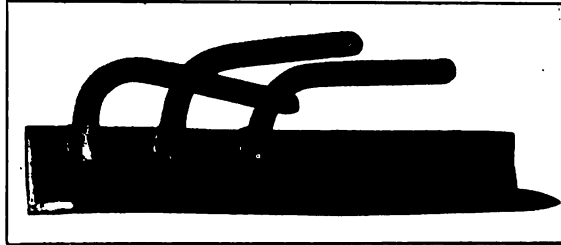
THREE PIECES OF ROUND IRON WELDED TO AN ANGLE IRON.
